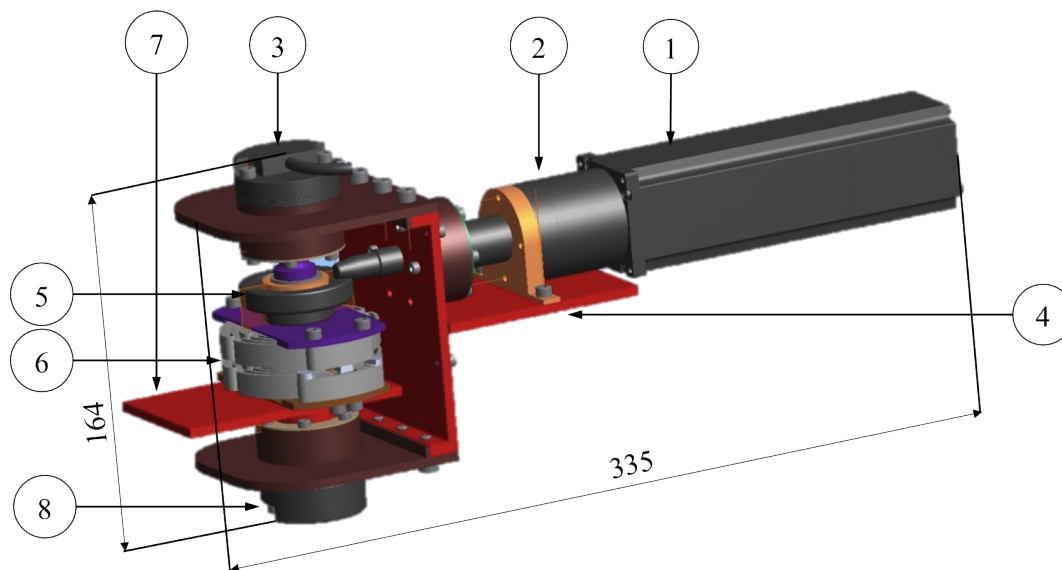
3D CAD view of rotary SEA 300W. 1: Maxon EC-4pole 45, 300W equipped with an integrated incremental encoder, 2: Maxon planetary gear, 3: absolute encoder, 4: fork-shaped frame, 5: KHK hypoid gear, 6: springs pack, 7: output link, 8: absolute encoder. Dimensions: 164 mm (thickness) \times 335 mm (axial length). Total mass is 3.5 kg.
